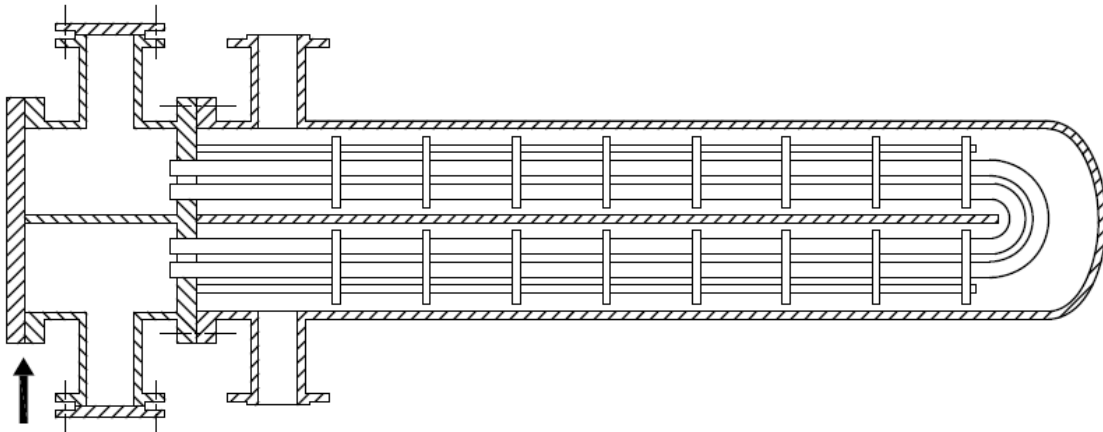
Tube Bundle Test (Spool and Tube Bundle under Pressure, Shell Cover Dismounted)
